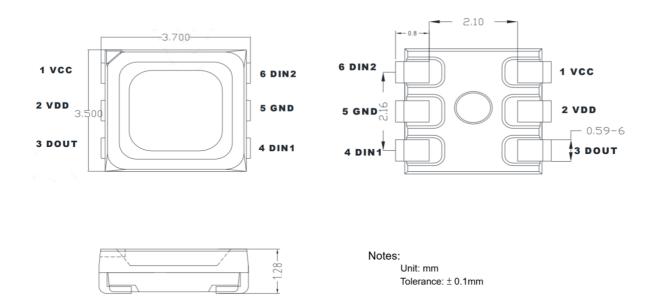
IN-PI33TCTPRPGPB Package Outline Dimensions
